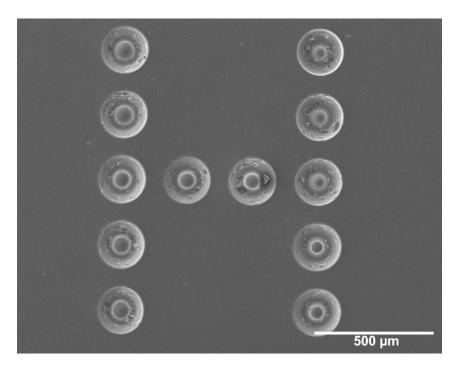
Machining of Letter "H" Using Blind Holes (Titanium)
